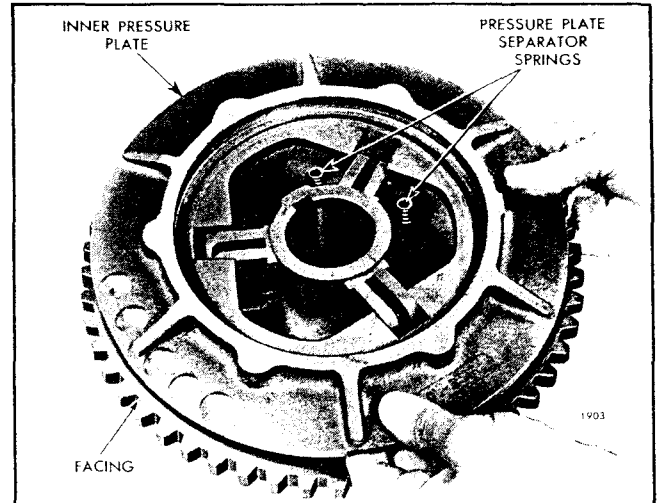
Installing Inner Pressure Plate With Springs and Clutch Facing in Plate
